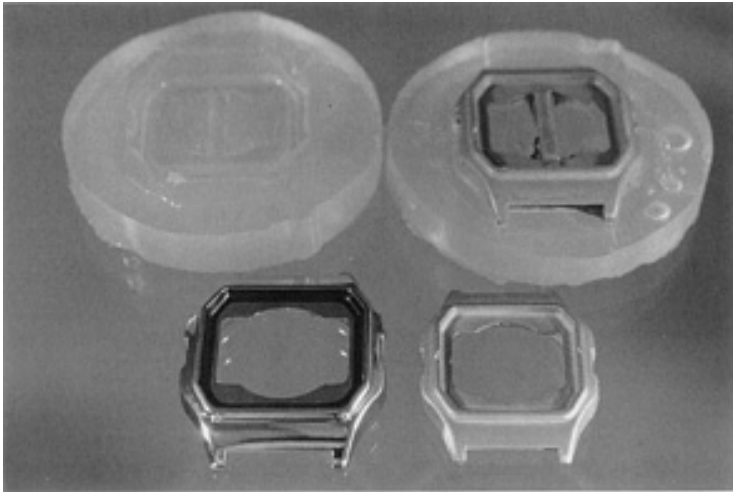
A flexible mold fabricated from RTV silicone. Clockwise from bottom left: master model, top half of mold, bottom half of mold and green part, final part after debinding and sintering. Courtesy of C.D. Turner, The Pennsylvania State University
